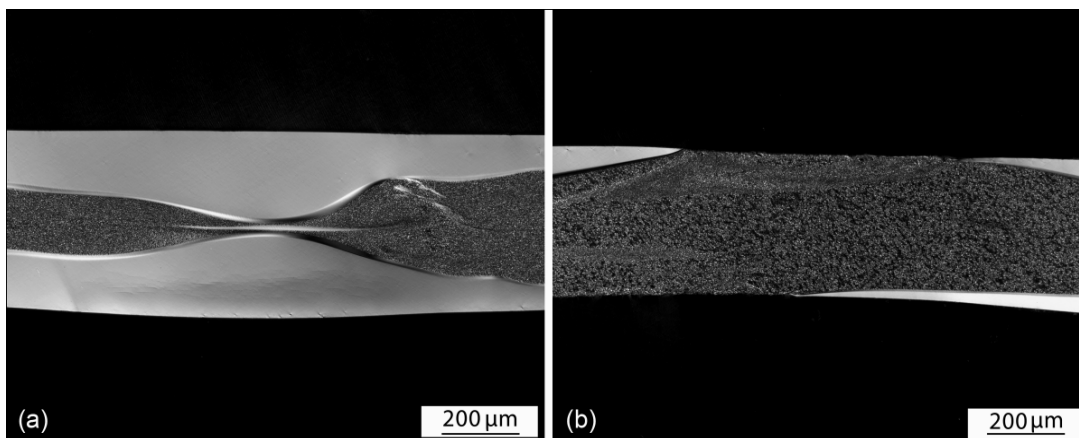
Micrographs of ultrasonic welded PLA films, 305  $\mu\text{m}$  thickness, detailing change of morphology in the weld after annealing for 90 min at 90  $^{\circ}\text{C}$  (left: welded 0.25 sec, right: welded 0.35 sec)
